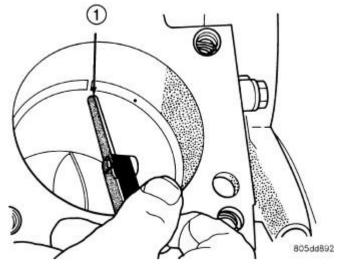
Ring Gap Measurement Courtesy of CHRYSLER LLC
